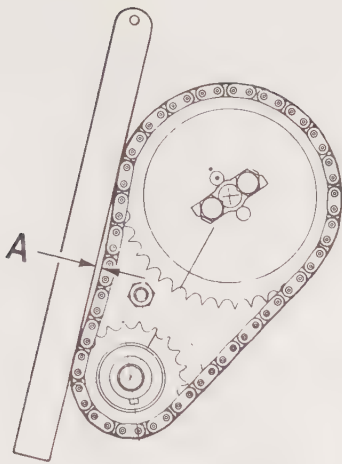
41 Method of gauging wear on timing chain. Dimension A should not exceed 0.25 in (6 mm).
